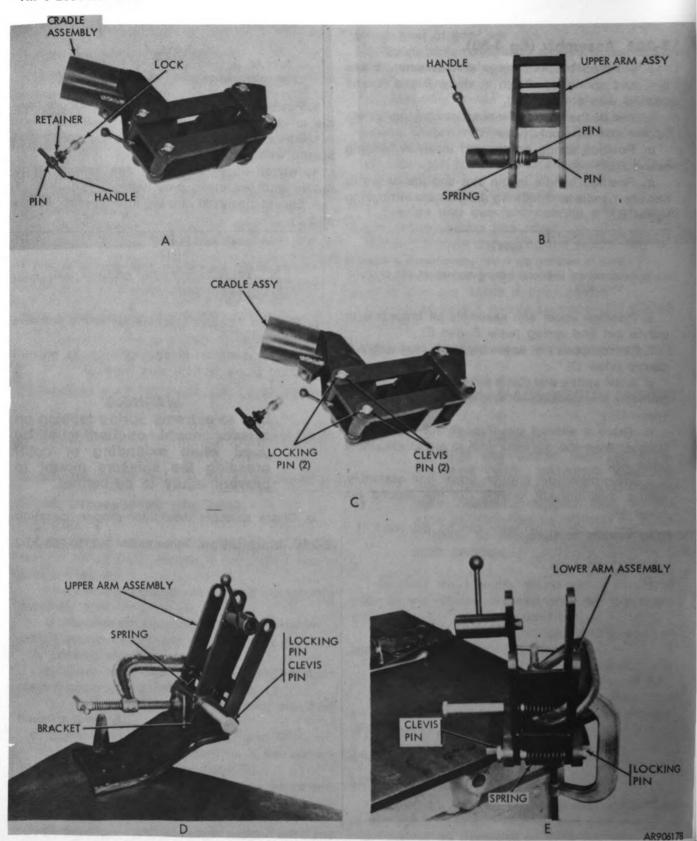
Low-profile cupola 7.62-mm machinegun scissors mount disassembly or assembly (vehicles serial numbered A1001 thru A1999 and A3375 thru A3999) (1 of 3).
